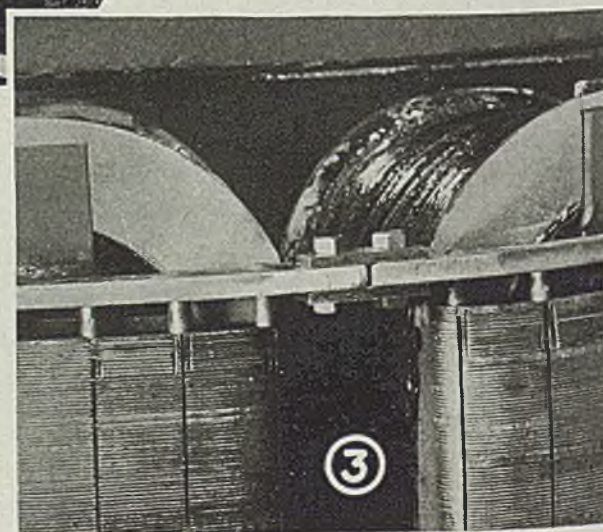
Complete end ring on a motor with upper and lower amortisseurs, but a common end ring
